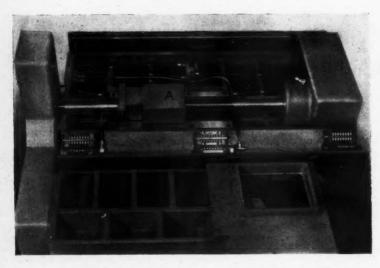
Close-up view of the under-side of the wheel-head for the type BG machine, showing the re-circulating roller bearing slideway units
